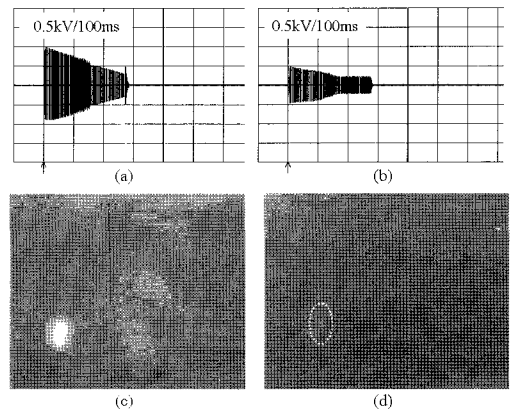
Waveforms and thermosonic images of a defect in a PCB plate(1.8 mm thickness)
